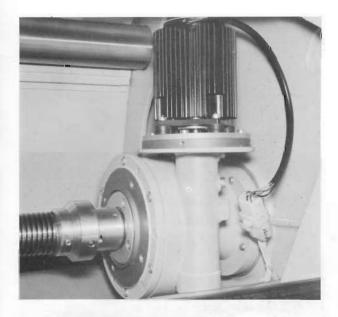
Scanning Cross-feed (Motor, Gear, and Spindle)
